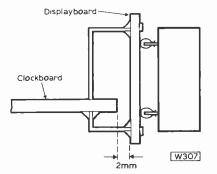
The Display board should be attached to the Clock board as shown above. The ideal distance between the boards is about 2mm. however the wire may be bent to alter this distance if required.
